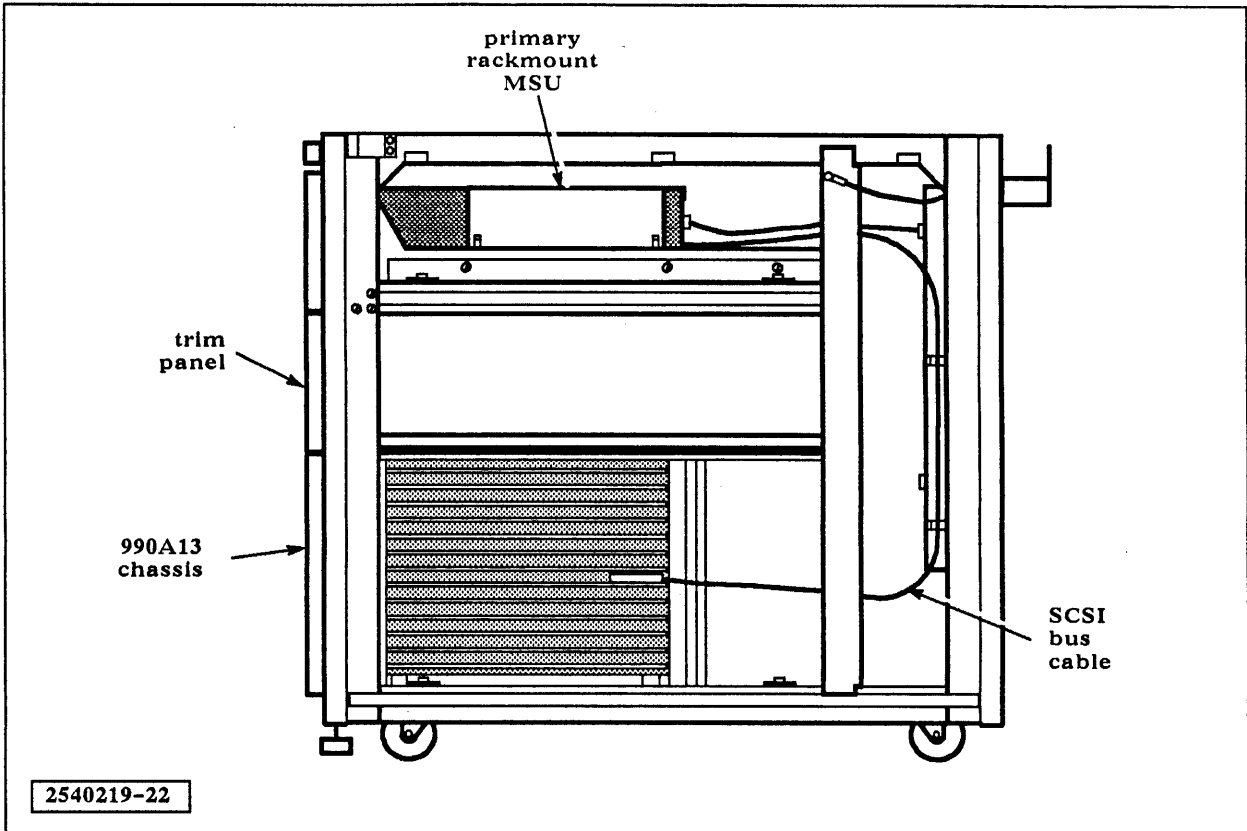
32-Inch Enclosure Side View, Side Panel Removed
